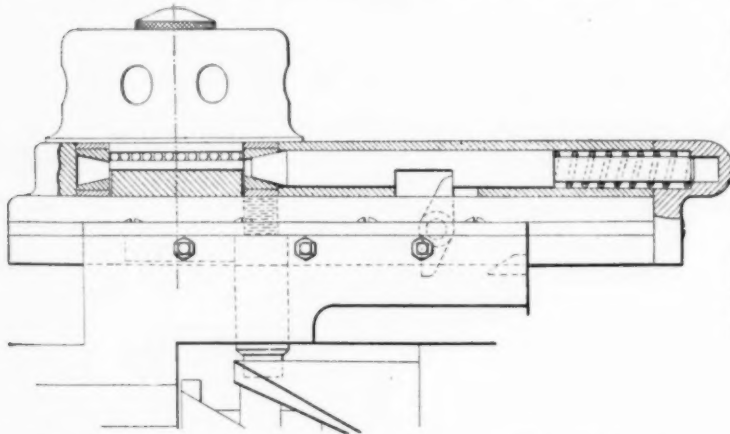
TURRET INDEXING MECHANISM OF THE "EMPIRE" AUTOMATIC MACHINE
